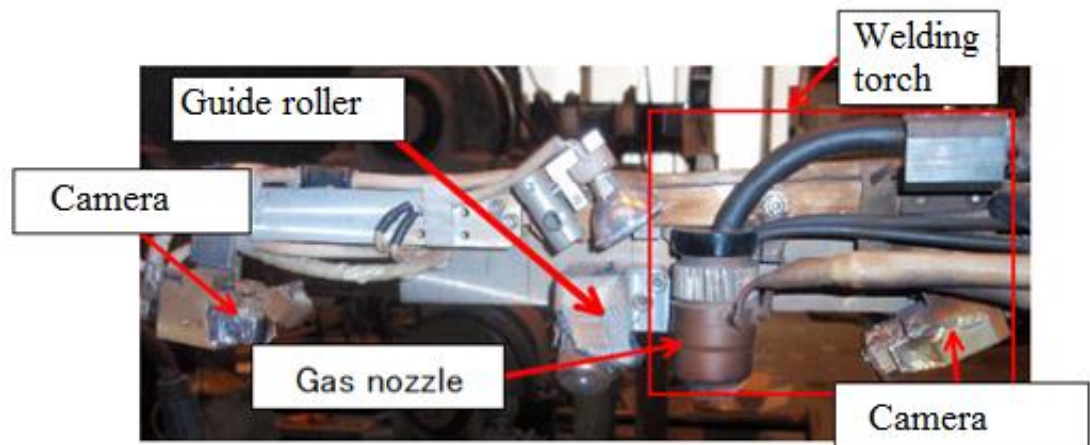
Welding torch schematic for the narrow part
